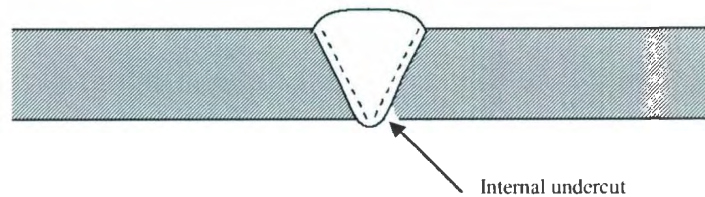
Internal or root undercut in a welding joint
